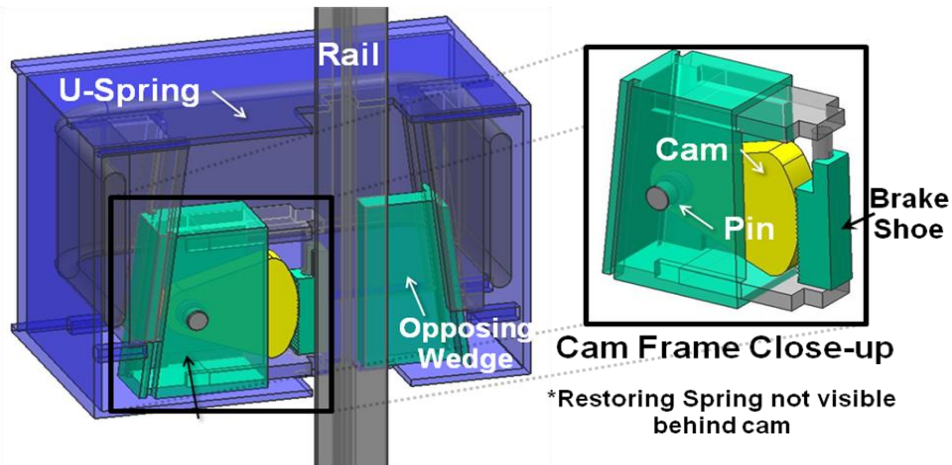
Isometric view of CAD model for rotating cam design with detail view of cam frame (right)
